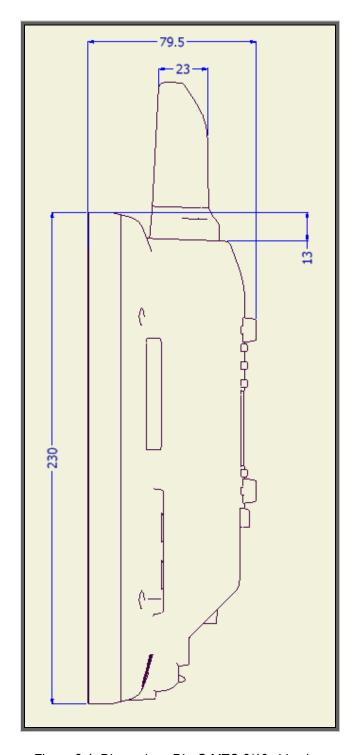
Dimensions DLoG MTC 6/10 side view
